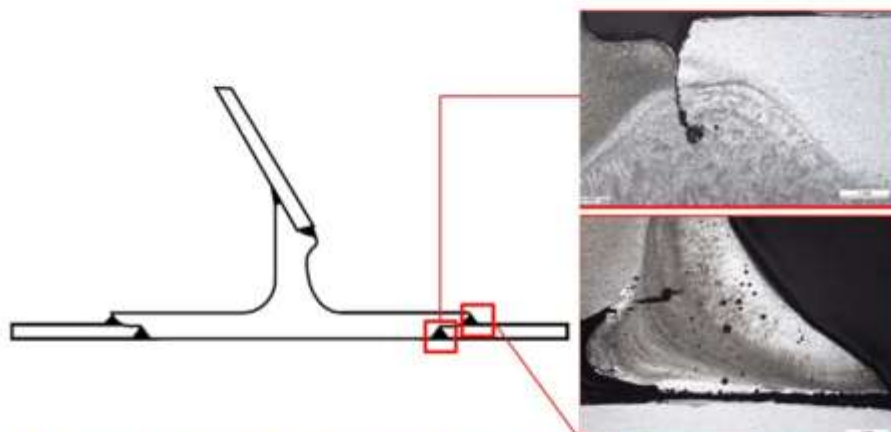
Images of sample RO-04. On the right images, the scale bars indicate 1.0mm length. The top right image shows the lack of root fusion defect, and the right frame shows the fracture between the internal fillet weld and the inner surface of the tanker shell along the fusion line.
